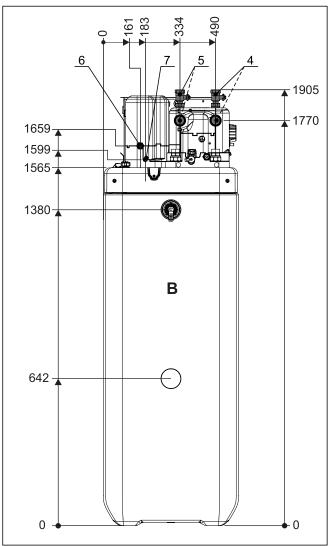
Dimensions, side view - ...04P30D/...08P30D
